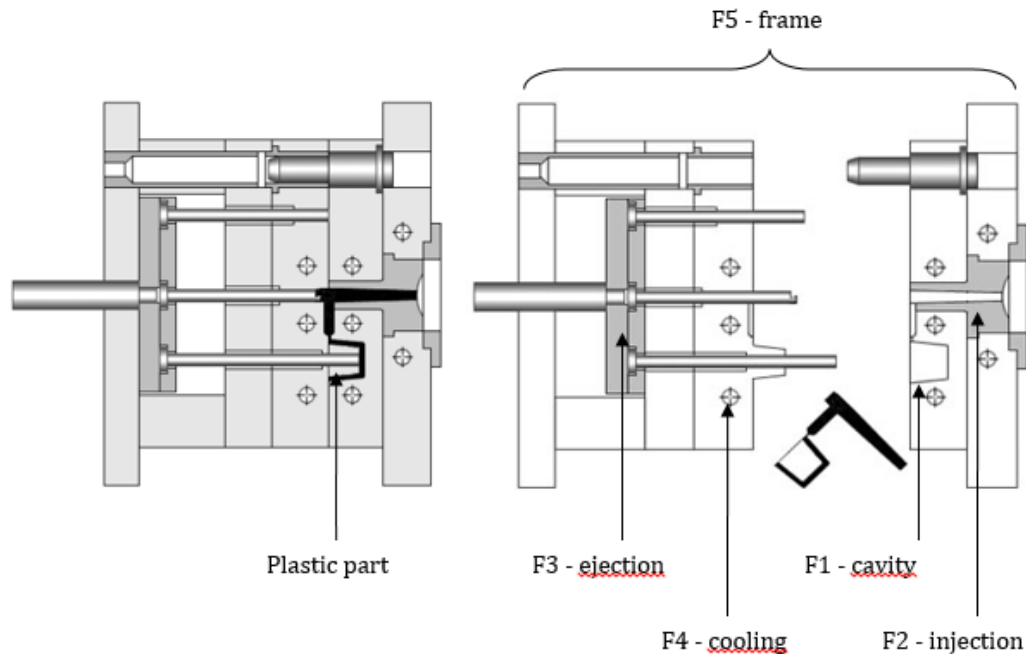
FIVE MAIN COMPONENTS OF A MOULD
